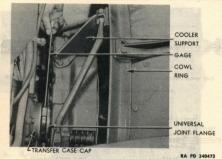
Checking Engine Alinement With Gage 41-G-13-300
